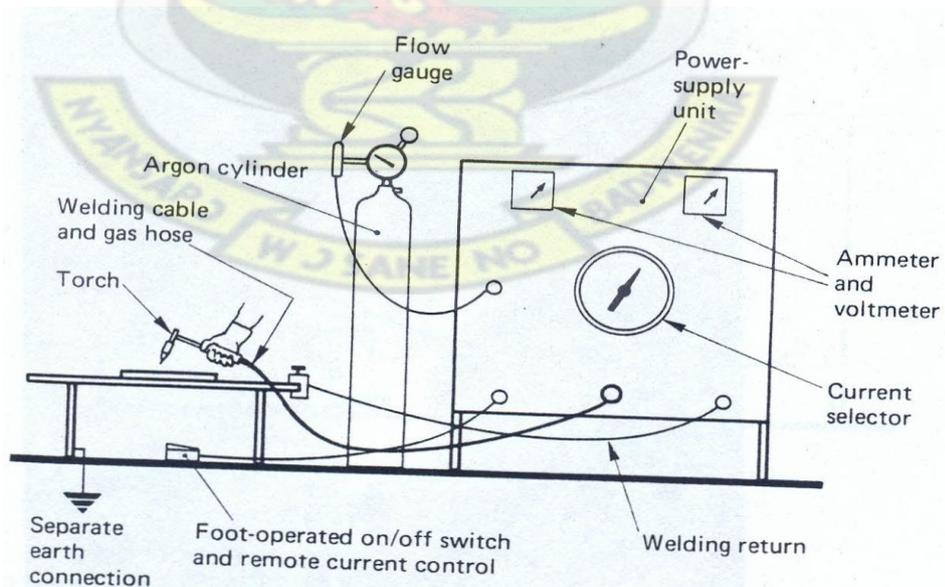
Equipment for GTAW welding (Gourd L. M. 1995).
